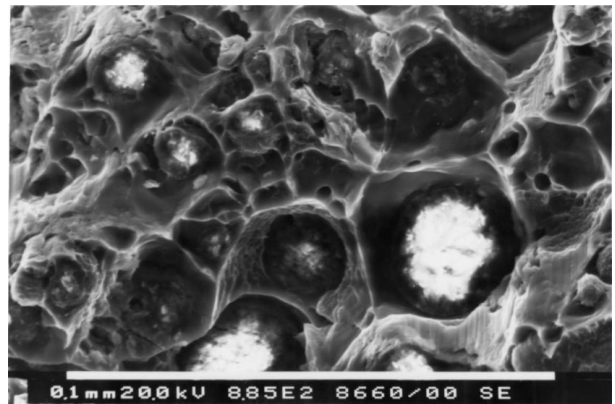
Fracture surface of a C85 specimen, fractured at low levels of strain.
